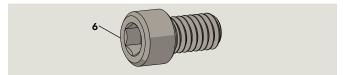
5/16 x 1/2" socket head cap screw
